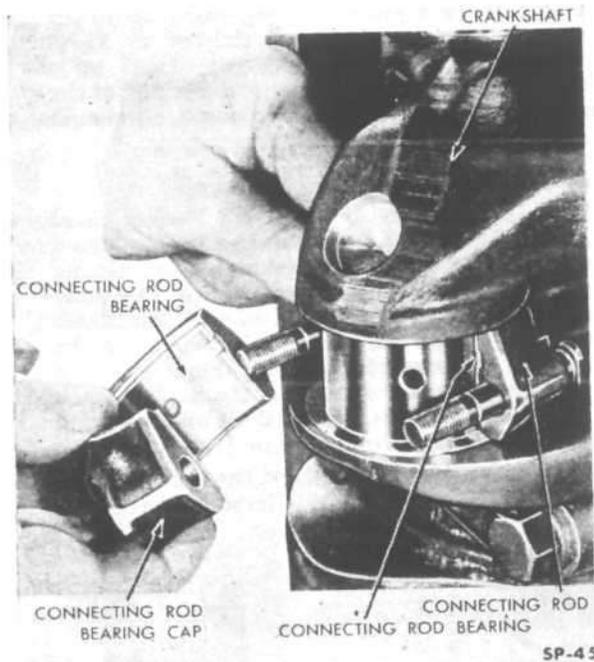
INSTALLING CONNECTING ROD BEARING CAP
